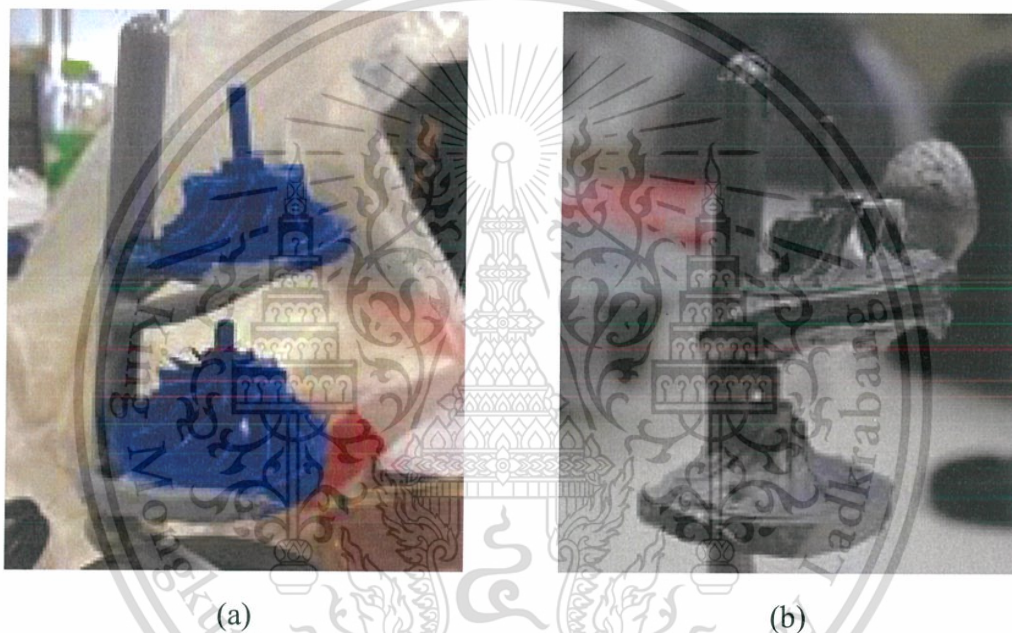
Periphery gating system: (a) wax pattern and (b) casting
